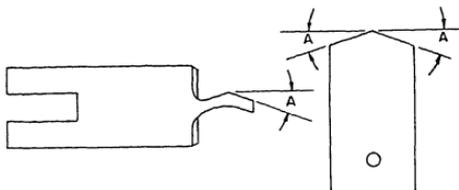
Tooth rest blades for staggered tooth cutters.
